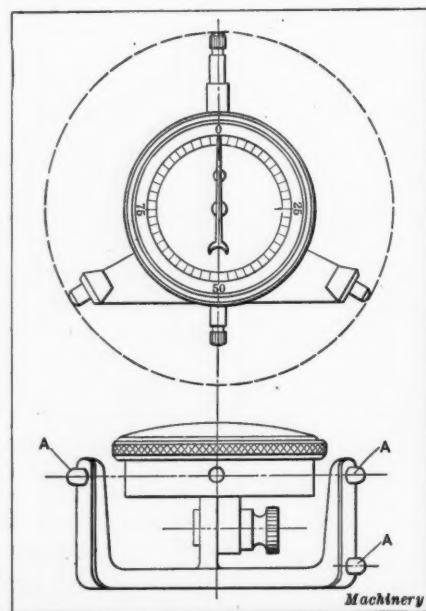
Gas Engine Cylinder Gage having a Three-point Bearing on Its Base
